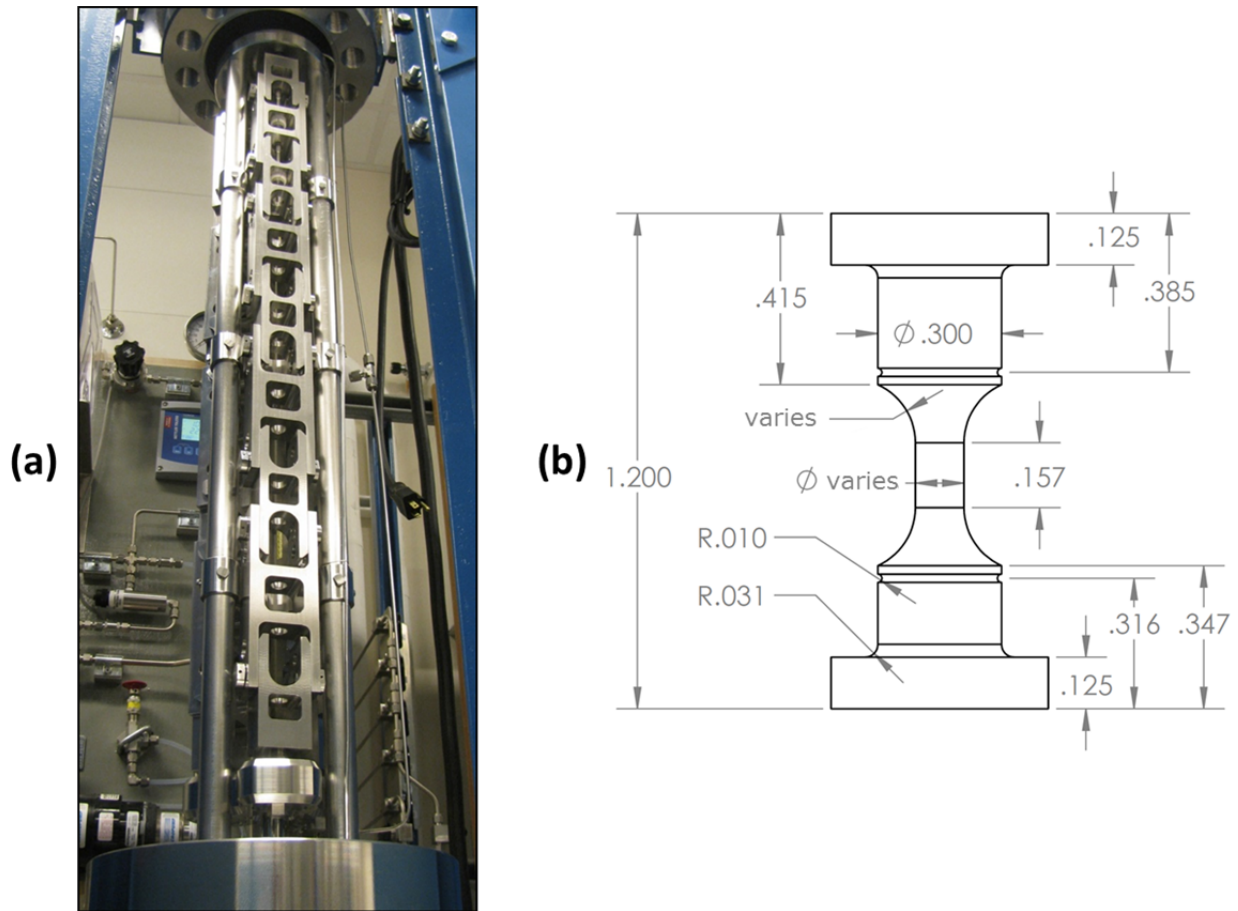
The 36-specimen crack initiation test system load train (a) and the dimensions (in inches) of the standard 1.2" tall tensile specimen (b) at PNNL.
